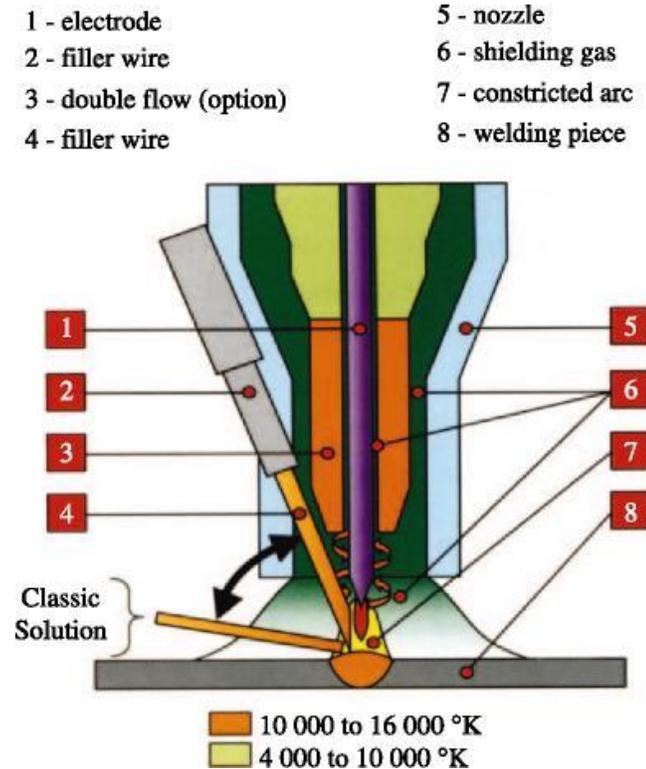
Layout of TOP TIG welding torch [100]
